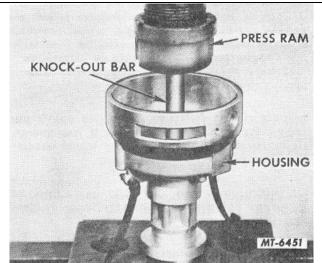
Pressing Out Lower Bushing Using Knock-Out Bar
